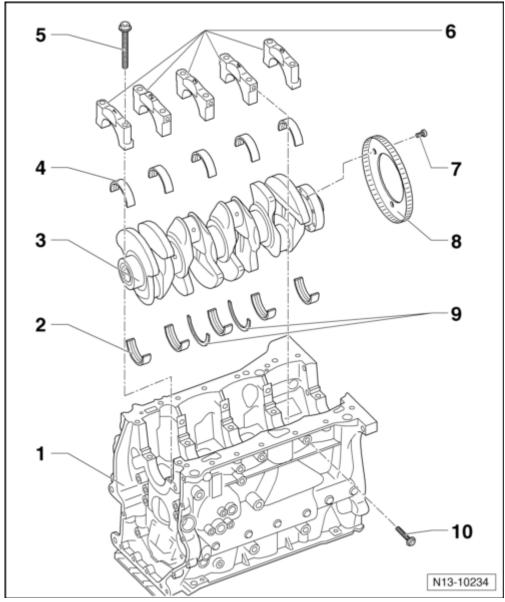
Identifying Assembly Overview: Crankshaft Courtesy of VOLKSWAGEN UNITED STATES, INC.
